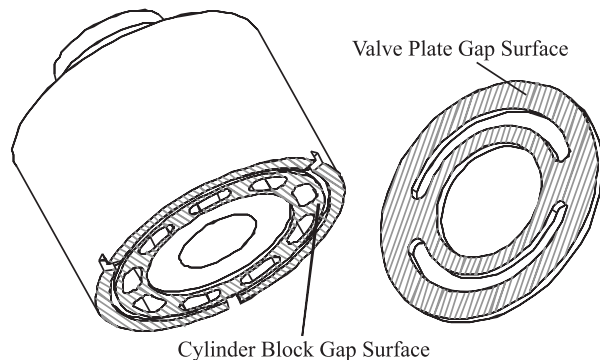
Sliding surfaces of the cylinder block-valve plate interface
